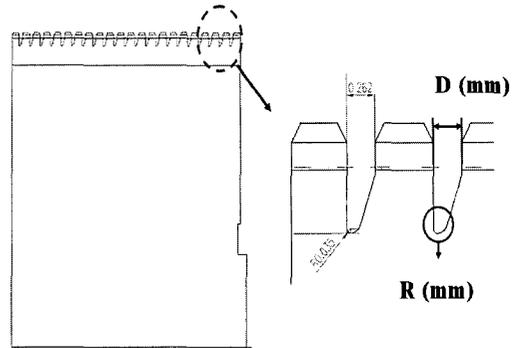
The drawing of the core pin(Ø=0.05mm)
